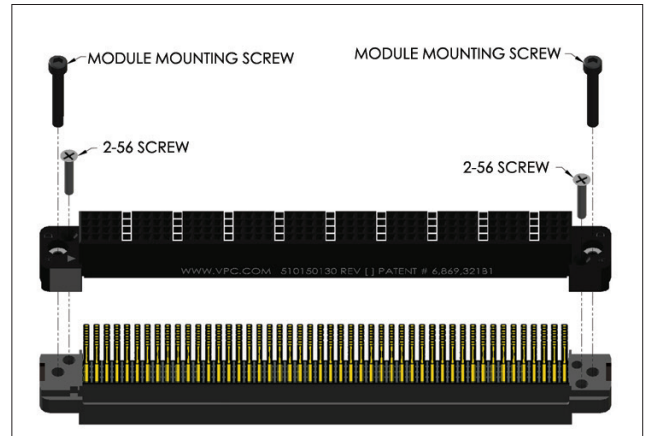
Figure A. The module is designed with a polarizing feature to make sure the cap is properly aligned.
